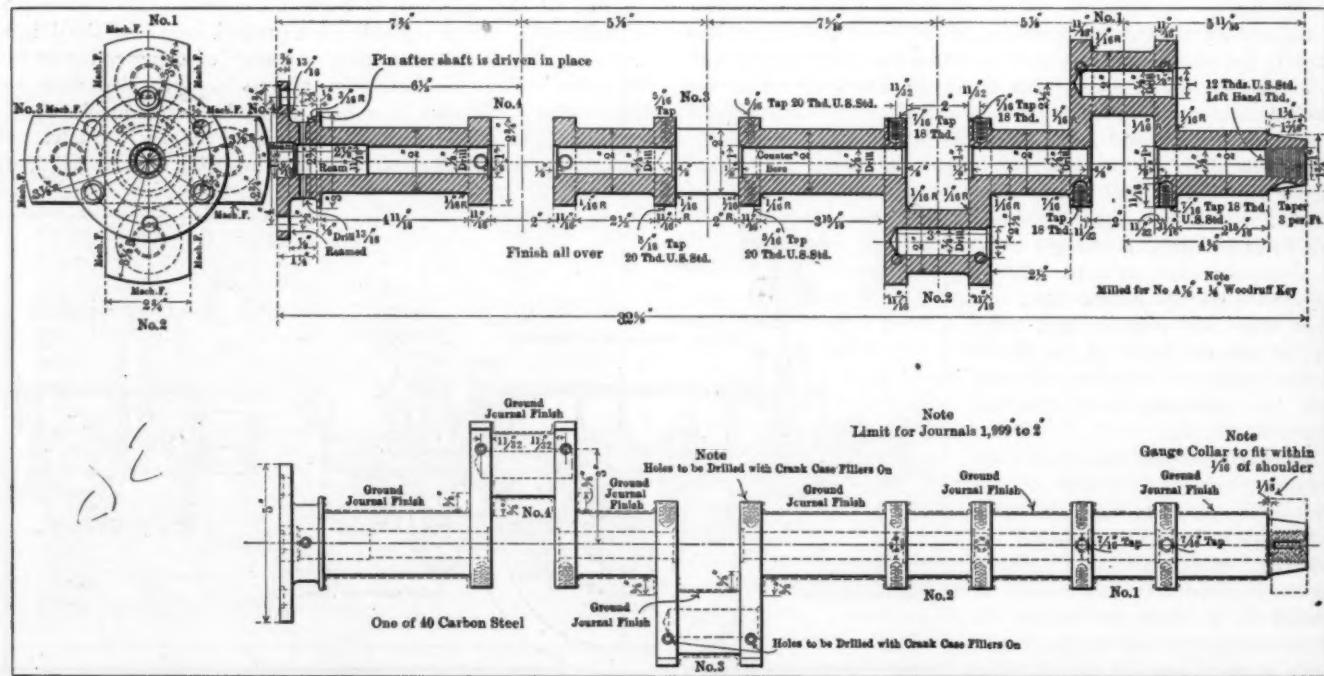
Section of crankshaft, showing arrangement of cranks, amount of metal eliminated by drilling and all dimensions.
